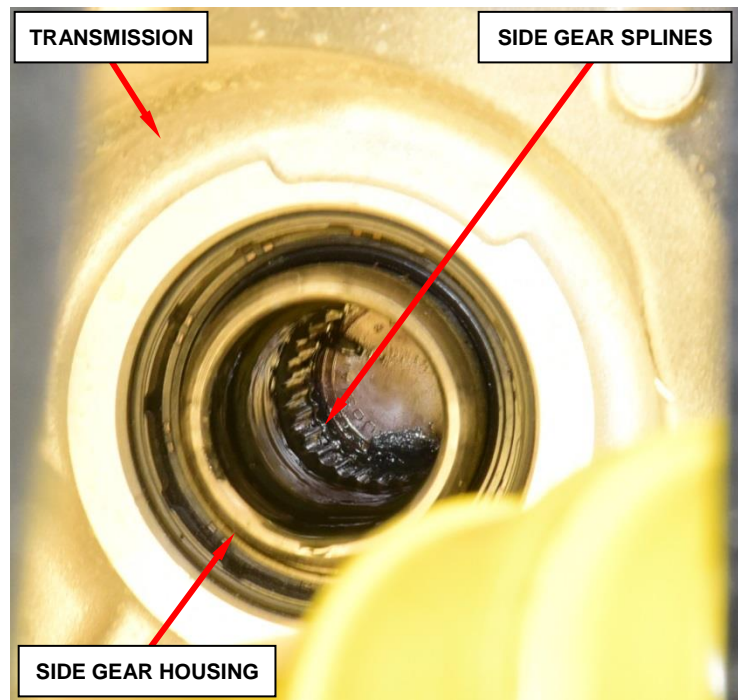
Clean/Inspect Transmission Side Gear Housing Splines
